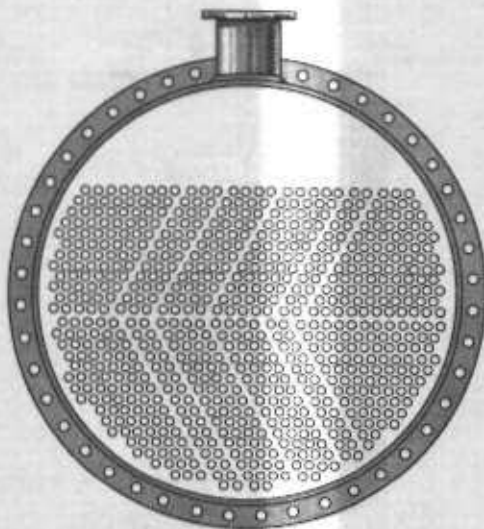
Flooded chiller with shell only partially filled with tubes in order to provide a large vapor disengaging area above the tubes. (Courtesy Worthington Corporation.)
